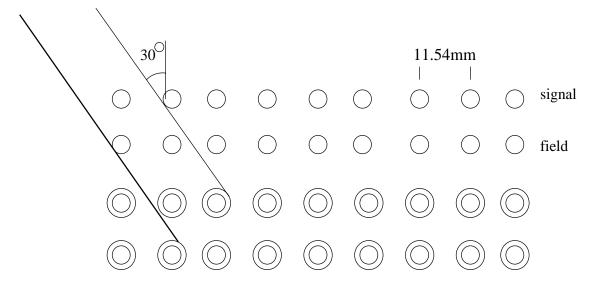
Illustration of the aluminum jig (for the U(V) frames). The top two rows consist or dowel pins 3.17 mm in diameter with the intent of placement. The bottom two rows consist of screws with each row dedicated to secure each type of wire. The different width lines correspond to the signal and field wires.
